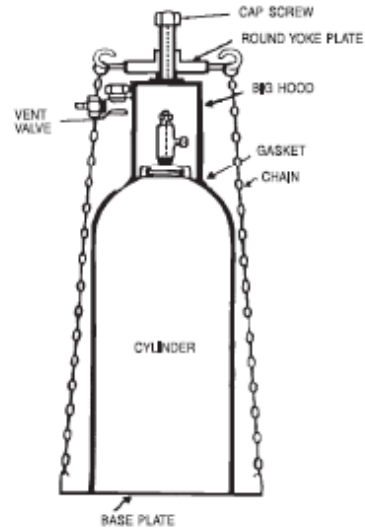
CYLINDER VALVE HOOD ASSEMBLY DEVICE
